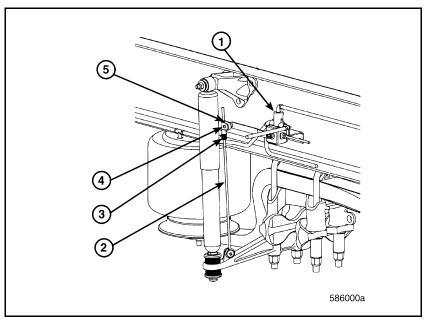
Height-Control Valve with Rubber Rod Ends (AL-405)
